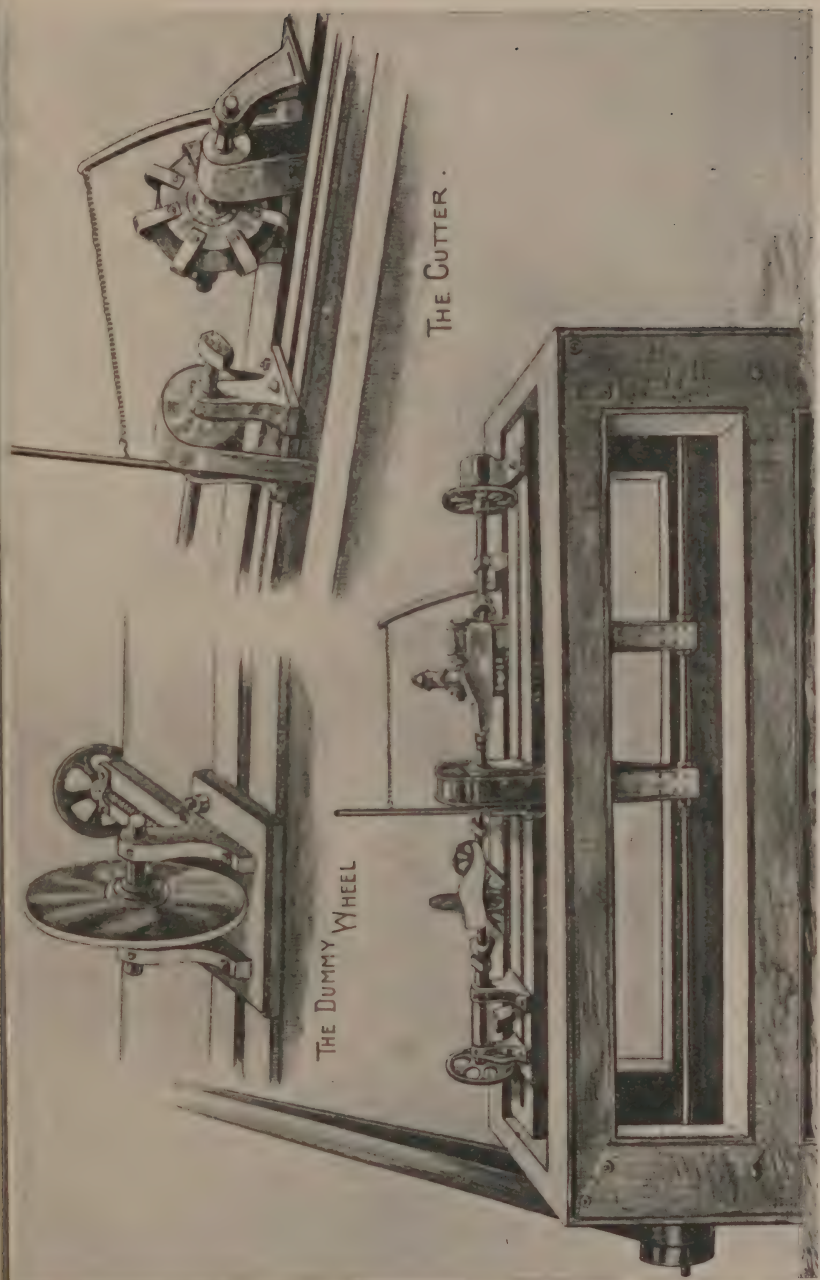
EARLY FORM OF LAST-MAKING MACHINE (ENGLISH).
